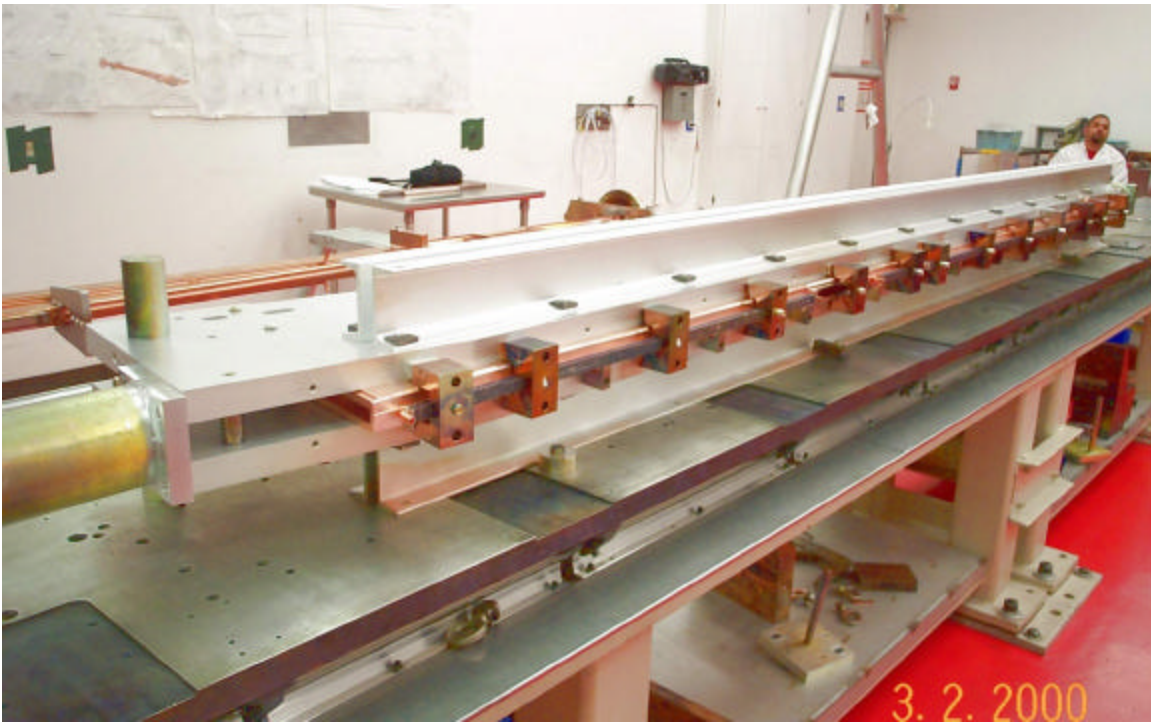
MCA BM1 Box with Cooling Line Weld Set-up
